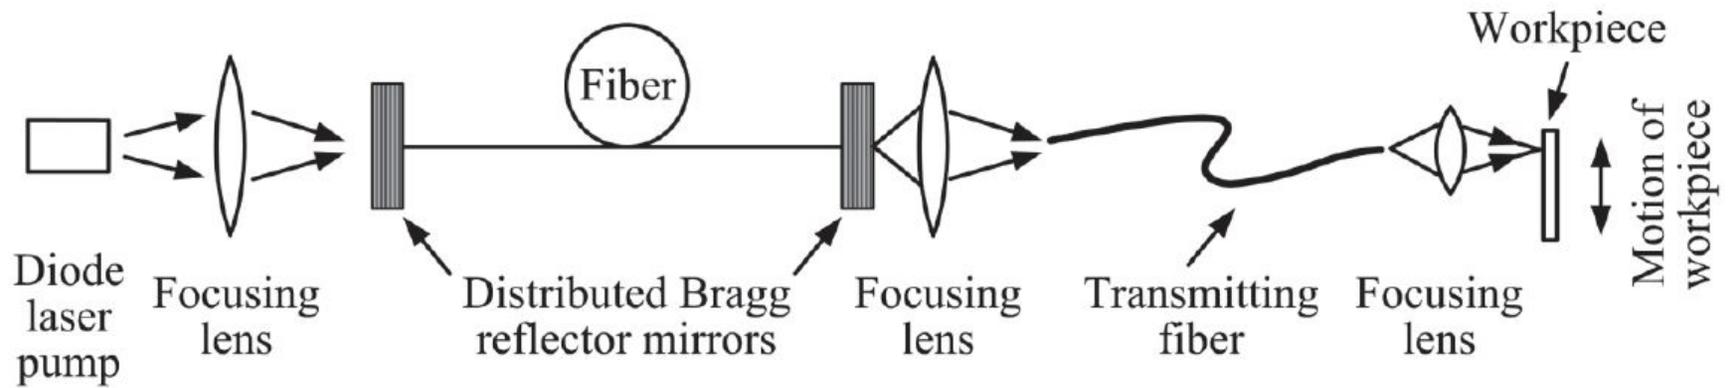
Typical arrangement for welding with a fiber laser
